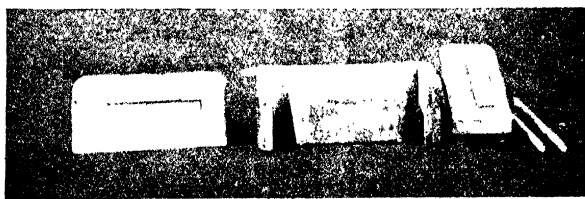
Outside Form Held Together by Screw Eyes and Dowel Rods; Inside Form Shaped for Lifting Out
